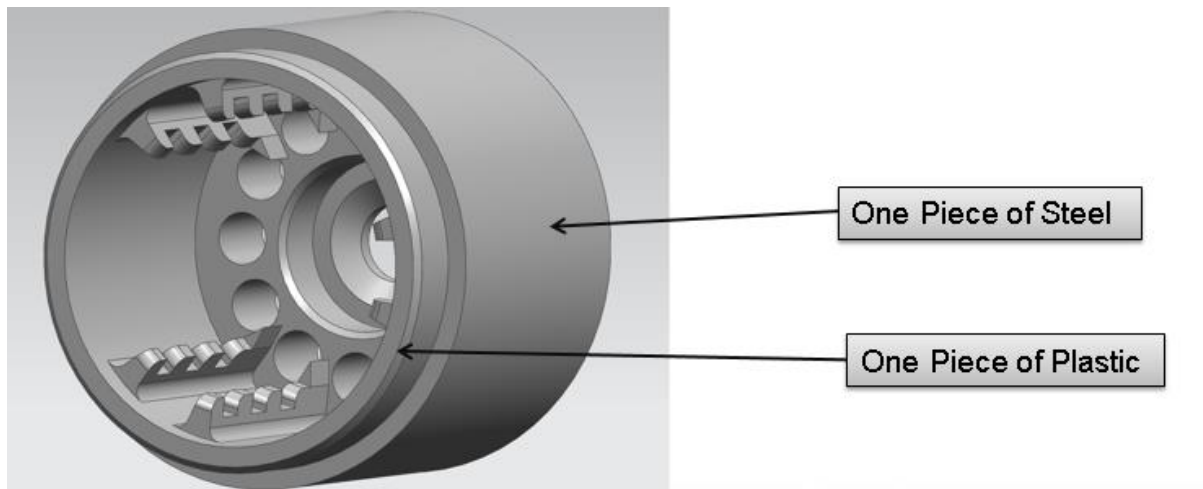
The male part of the double layer housing frame: plastic and stainless steel
